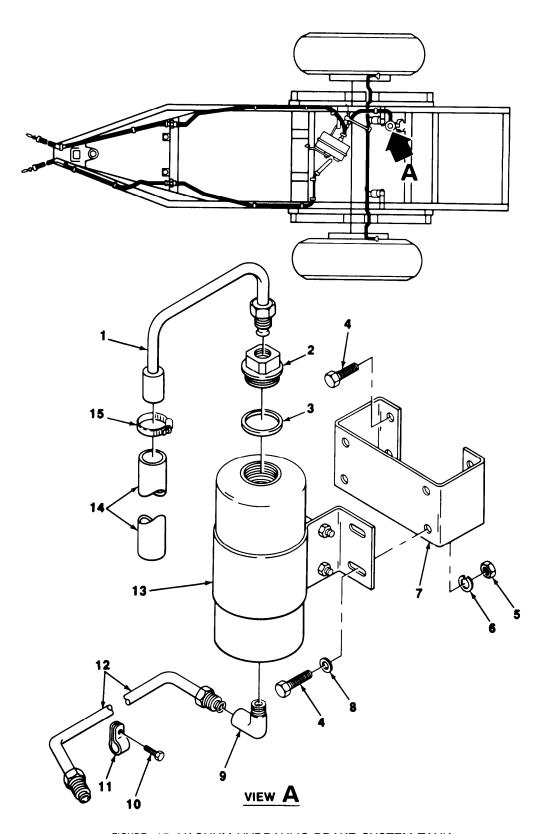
VACUUM HYDRAULIC BRAKE SYSTEM TANK ASSEMBLY (M105A2C).
